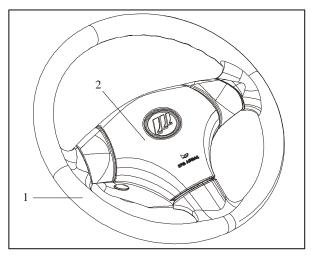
steering wheel assembly 1-steering wheel 2-SRSair bag
